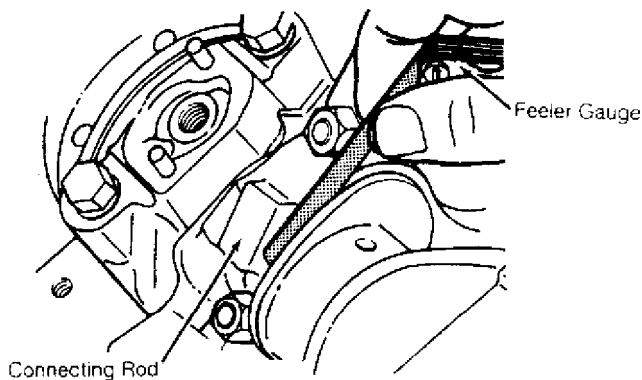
Measuring Connecting Rod Side Clearance - Typical
